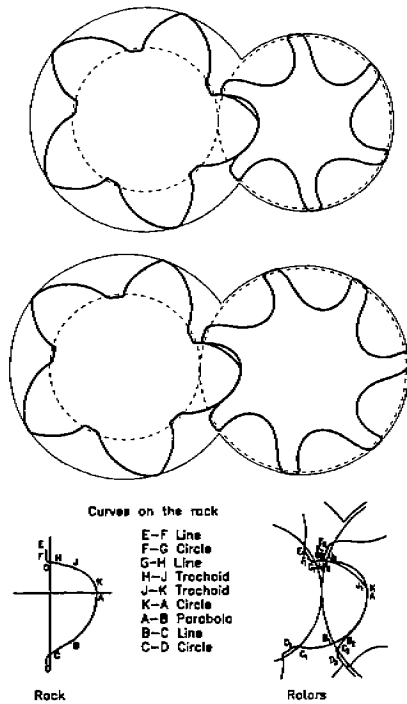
5/6 and 6/7-127.5 mm Rack Generated 'N' Screw Compressor Rotors
